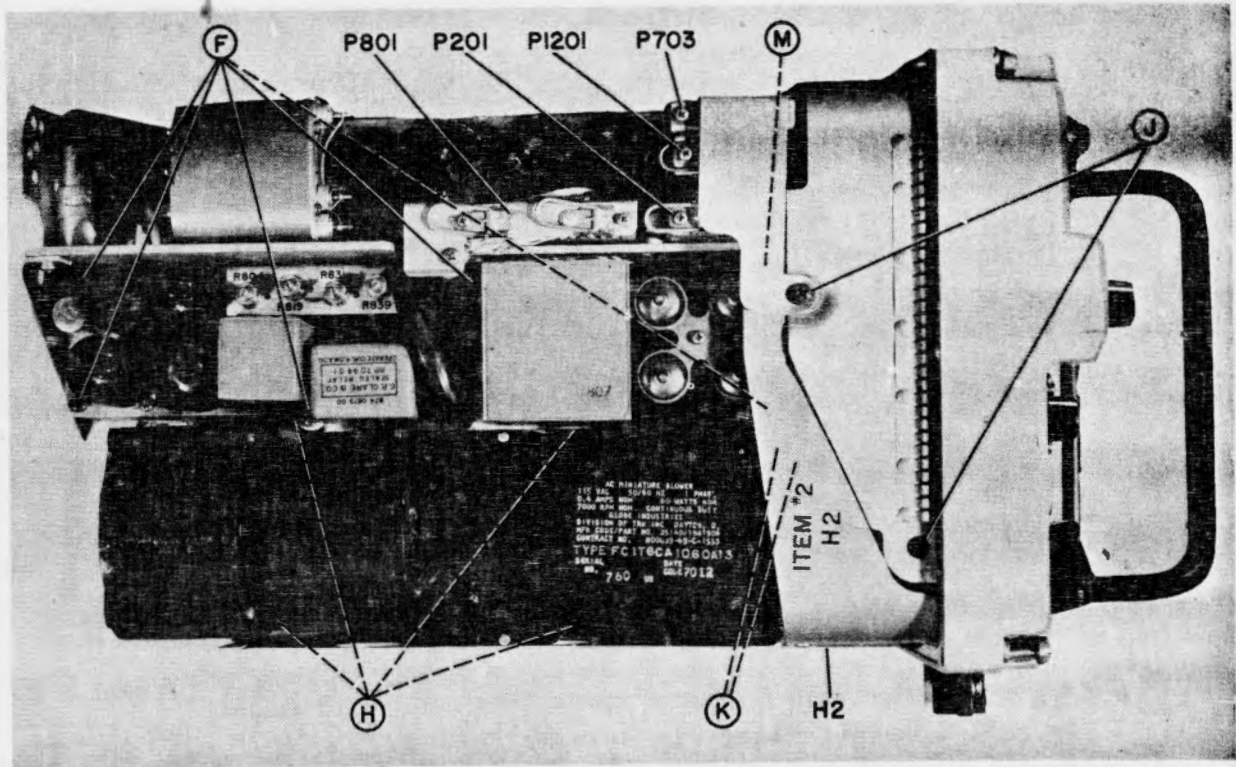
Receiver-Transmitter RT-581( )/URC-9, Left Side, Subassembly Removal
